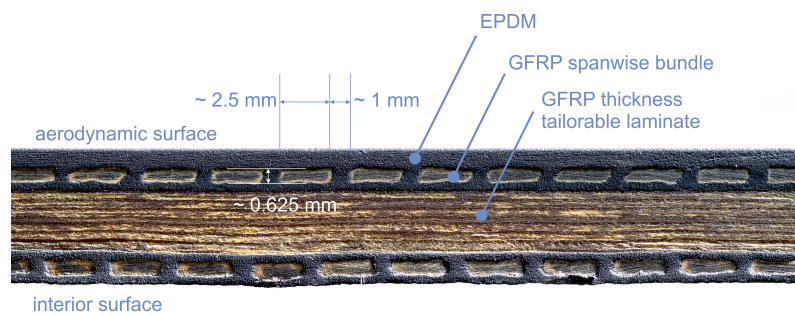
Labelled cross-section-detail photograph of the manufactured skin.
